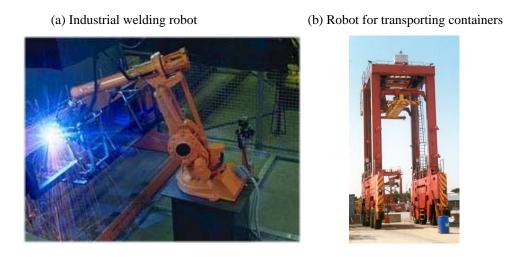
Industrial Robots: (a) a typical welding robot. (b) Autonomous robot for transporting containers on a loading deck [Durrant-Whyte, 1996].
